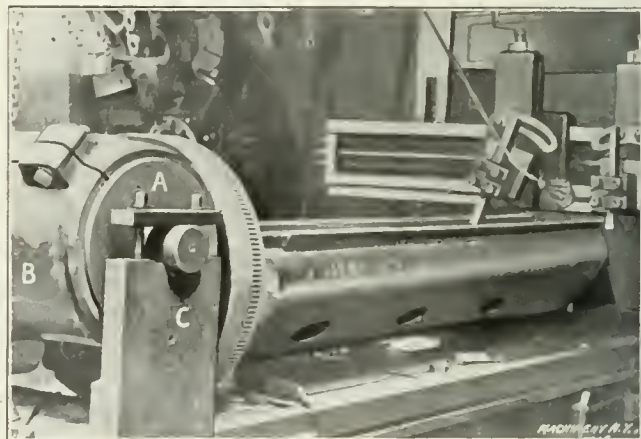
Method of Mounting Radial Arms on Planer to plane Saddle Slides
